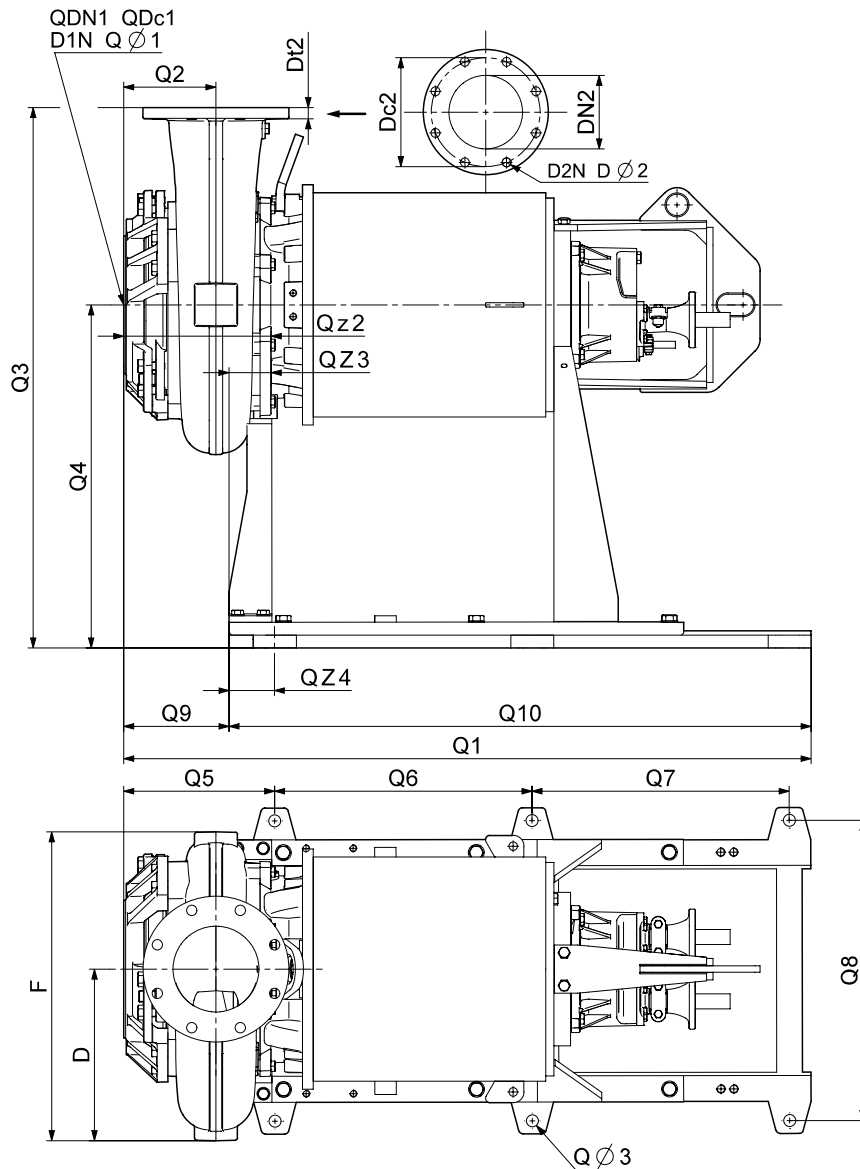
Dimensional sketches, dry, horizontal installation on base stand
